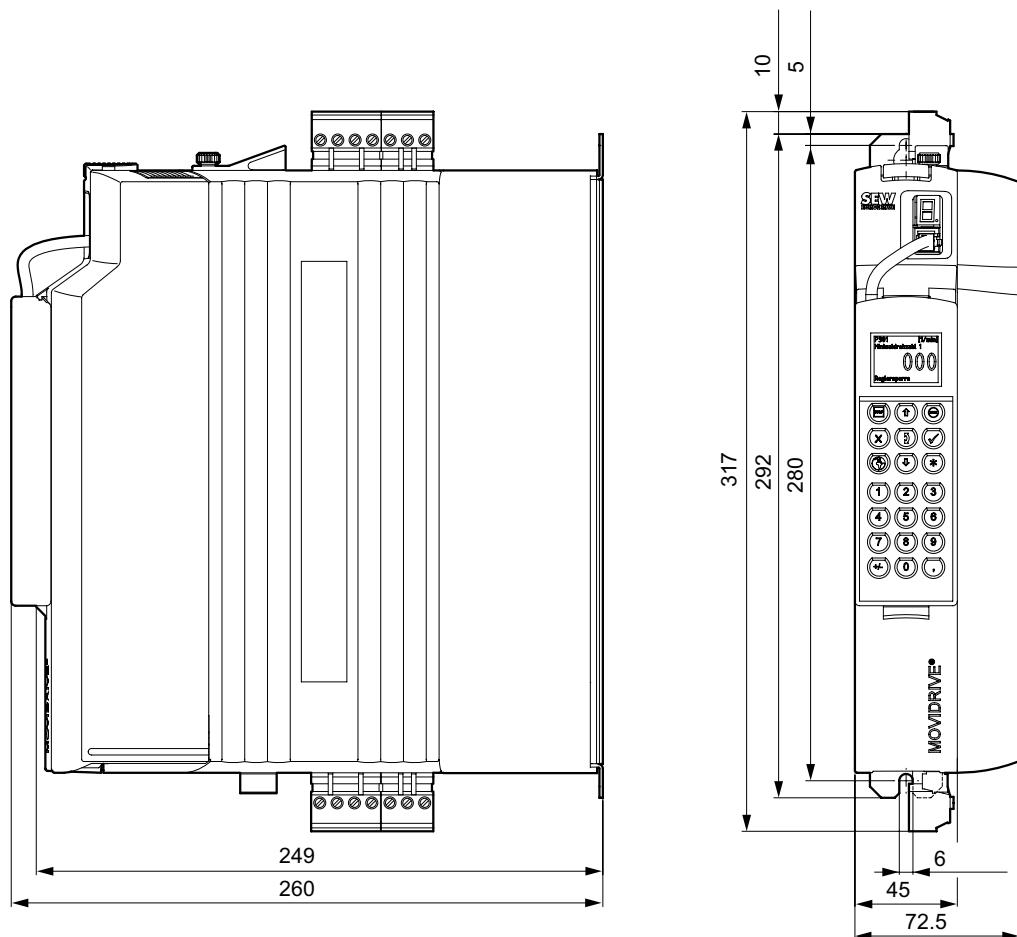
Dimension drawing for MDX61B size 0S, dimensions in mm
